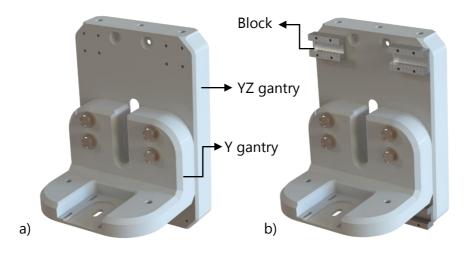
Y axis subassembly a) without mounting points; b) with mounting points.
